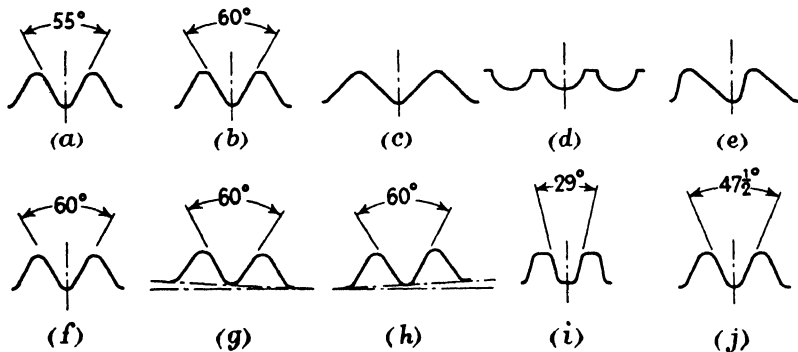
THREAD FORMS OBTAINABLE WITH PANTOGRAPH TRUING DEVICE ON A "J. & L." MACHINE
